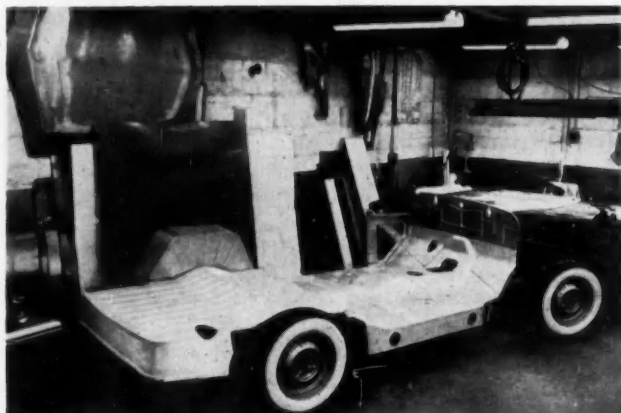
Top view of aluminum under-body assembly mounted on standard steel chassis
